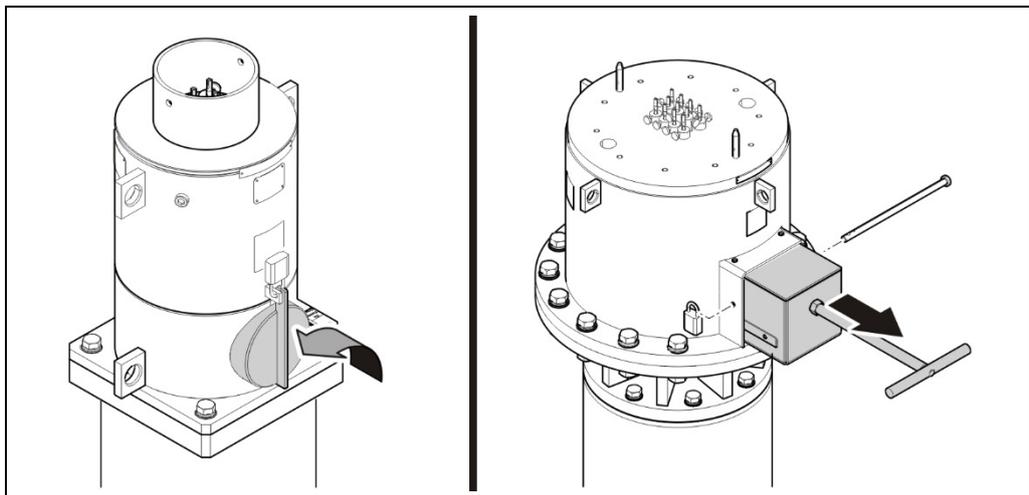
Shutter open (OPEN position); left: locking cylinder, right: slide shutter
